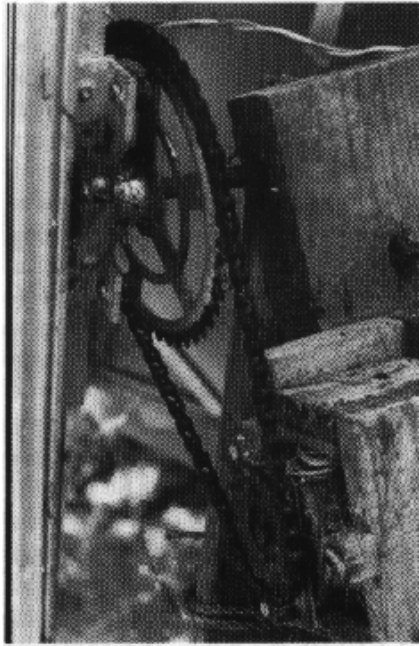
The chain drive assembly using geared down chain drive and a Peugeot windscreen wiper motor.
